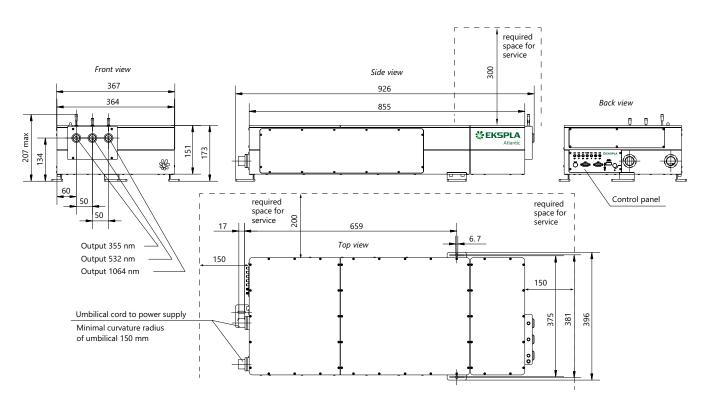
Outline drawings of Atlantic 50, 80 laser head with two and three outputs (dimensions in mm)
